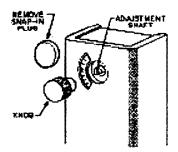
Drawing showing snapin plug removed and the knob in line to assemble. Press the knob onto the slotted shaft.
